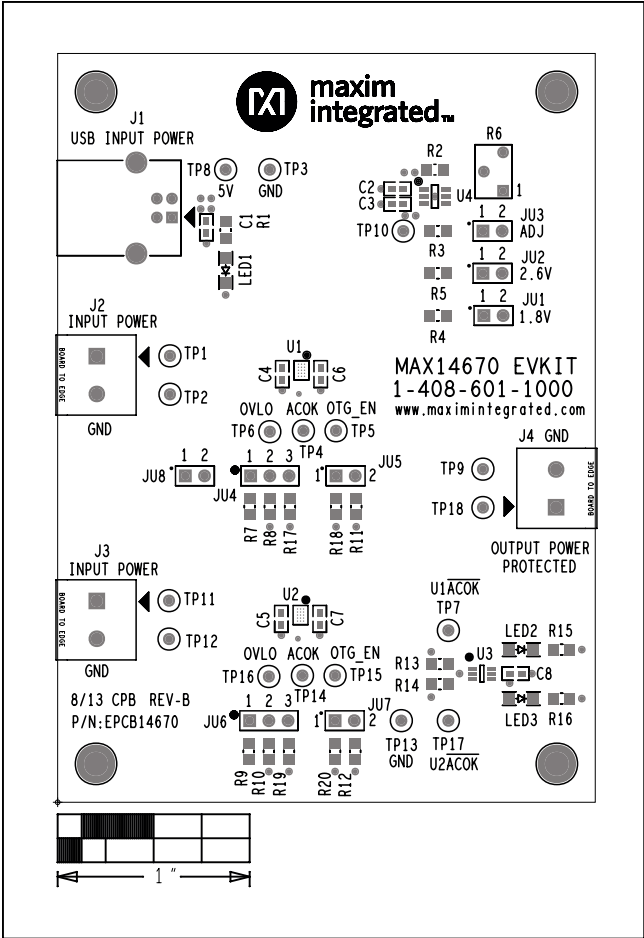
MAX14670 EV Kit Component Placement Guide—Component Side
